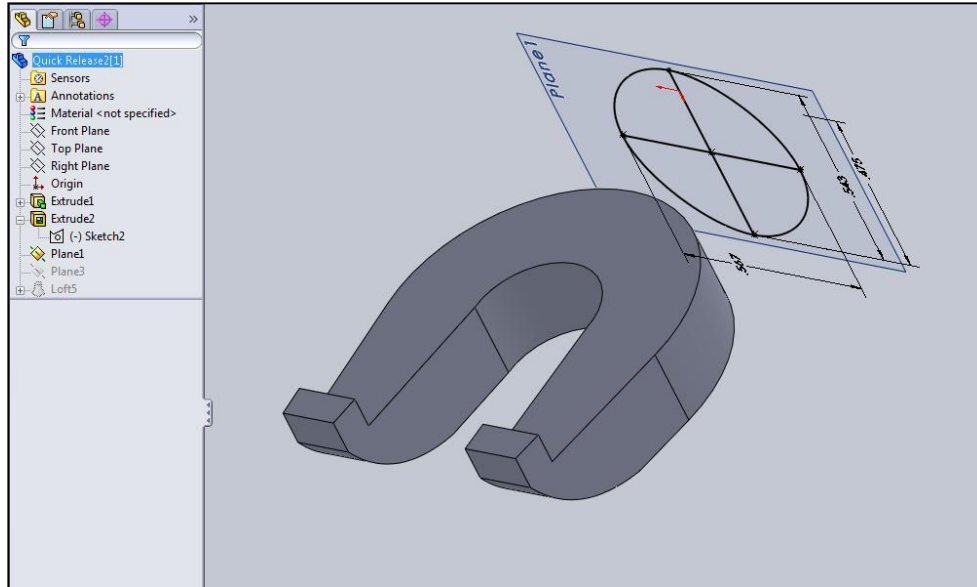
Sketching the Preliminary Shape and Extruding.
